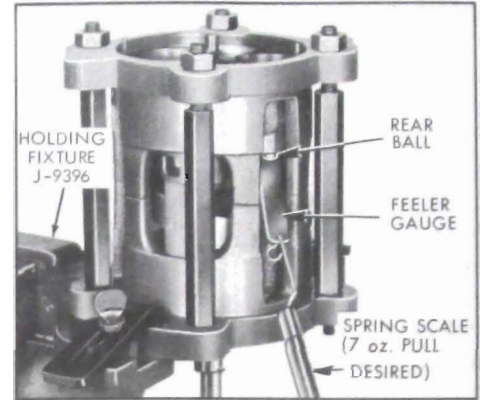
Checking Selected Feeler Gauge with Spring Scale
